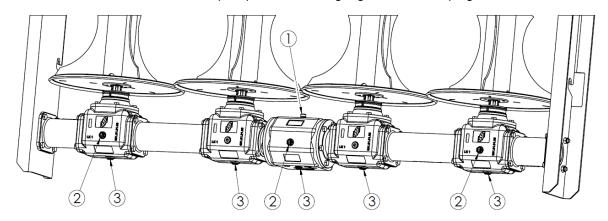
The oil-level check points of the beater-unit gearbox 1 - oil inlet (vent), 2 - oil-level sight glass, 3 - drain plugs
